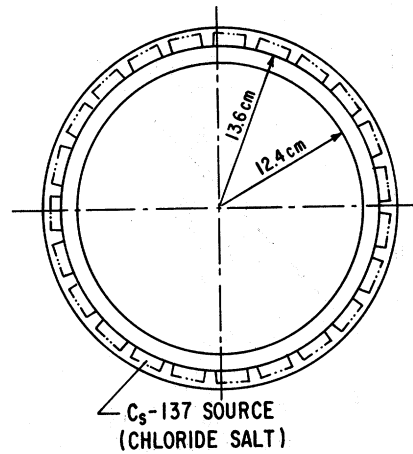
Cross section of the source holder with the location of the Cs-137 source.
